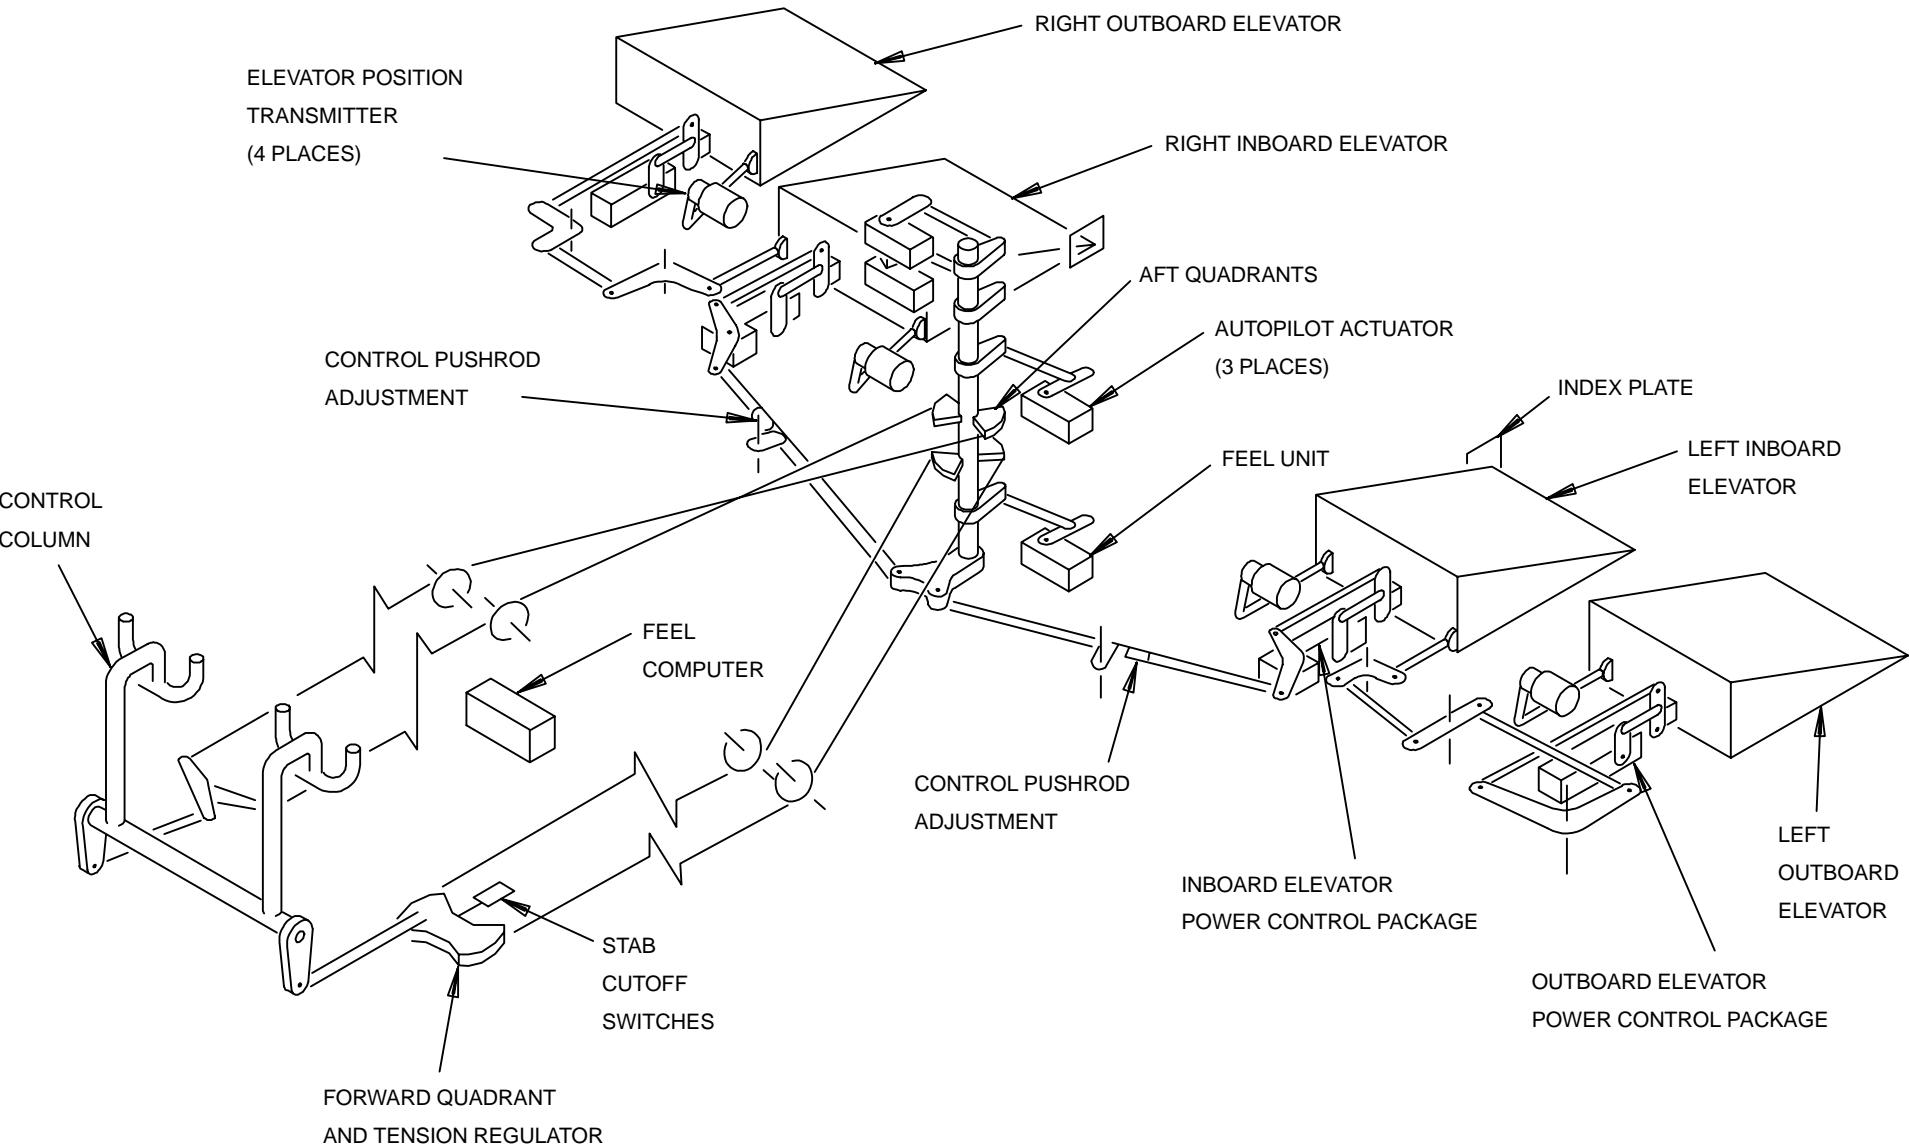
ELEVATOR CONTROL SYSTEM SCHEMATIC
